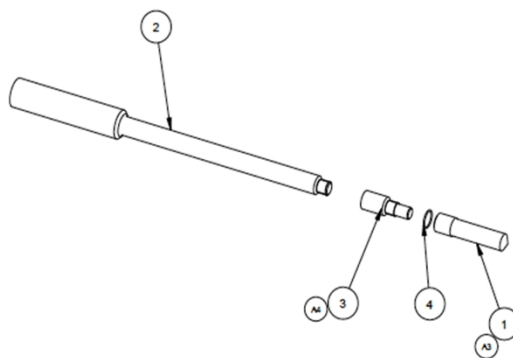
Drawing of holder for alanine pellets. The end capsule can hold six standard alanine pellets (5 mm diameter, ~3 mm thick). A single stem (part 2) is used for multiple holders.
